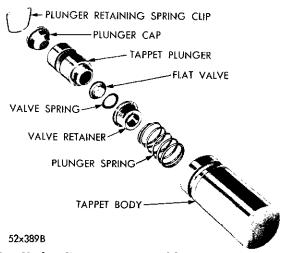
Hydraulic Tappet Assembly (Exploded View)
